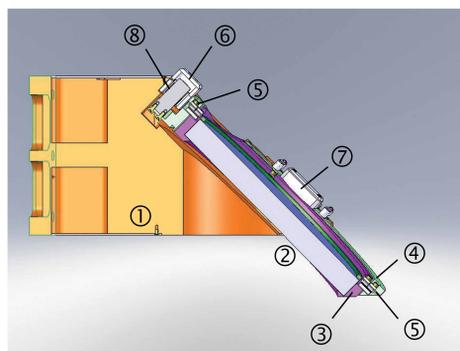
CAD model cut along the Y axis of the stage base (orange part 1), Dichroic mirror (2); inner gimbal (3); outer gimbal (4); Flexural pivot bearing (5); drive X-axis (6); drive Y-axis (7); runner (8)
